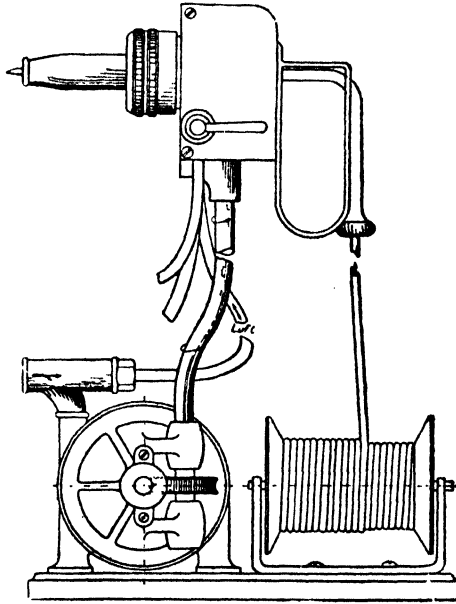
Complete Assembly of the Thick Wire-spraying Device employing Separate Wire Feed Turbine.
